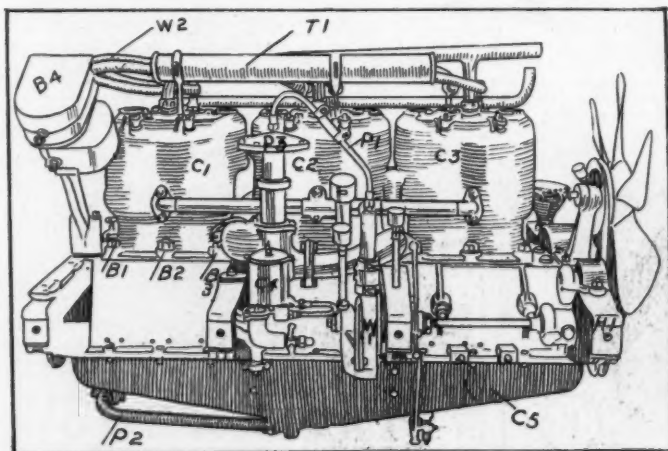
Sketch of right side of six-cylinder Napier motor, showing the diaphragm connection from the carburetor to the water pump, secure wiring, and four points of fastening to the chassis frame.
